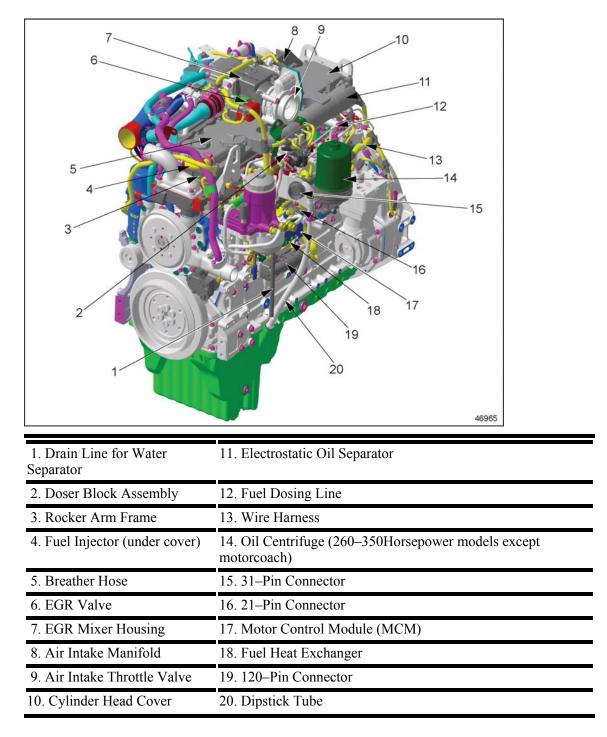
Left Side View of MBE 900 Engine (Dual-Stage Turbocharger) and Components
